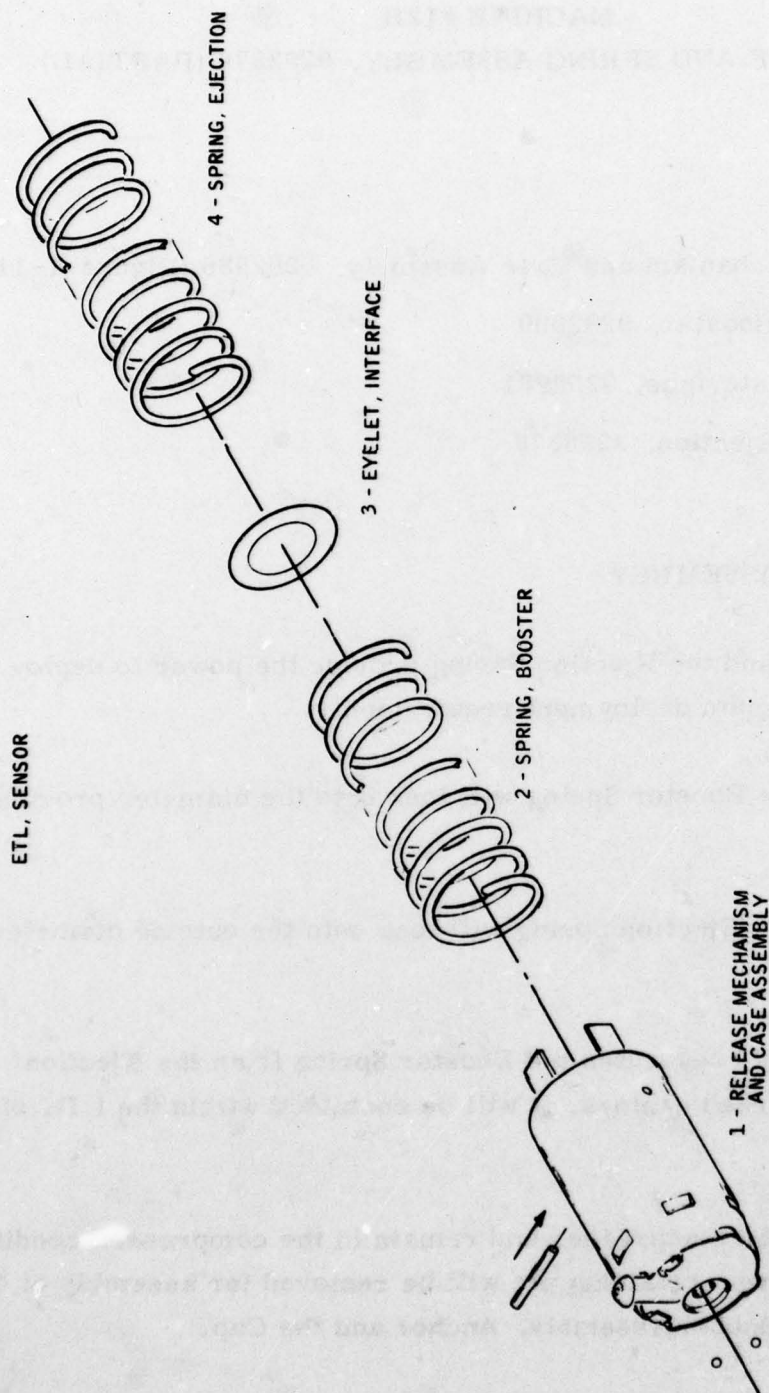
Machine #12B - Sensor Case and Spring Assembly
